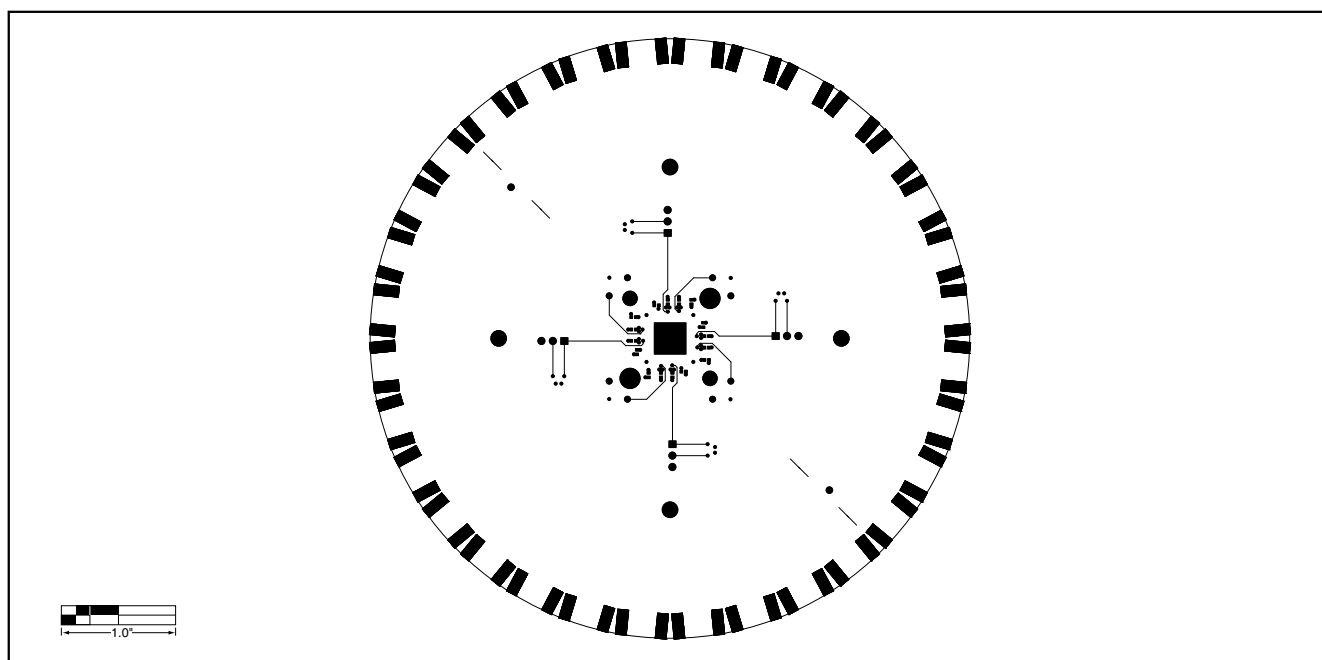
MAX3802 EV Kit PC Board Layout—Solder Side
